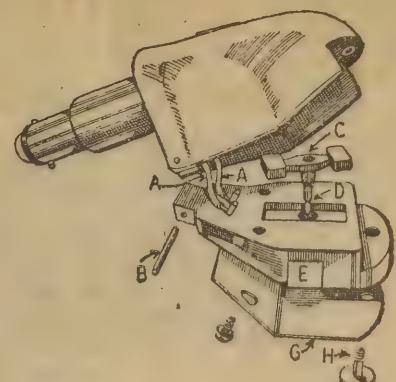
Pickup exploded. A—leads from the coil; B—hinge pin; C—rubber mount for armature; D—the armament; E—the armature; F—magnet; G—cover plate.
